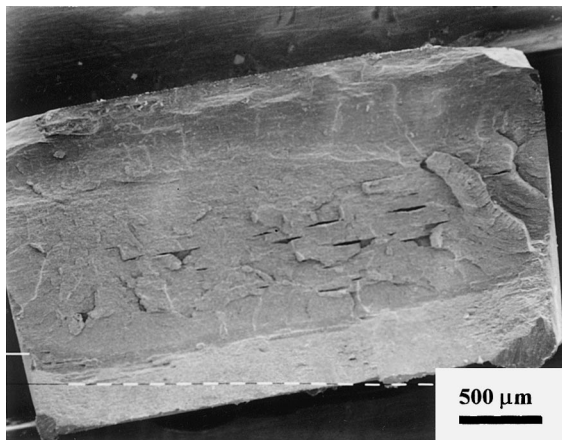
Typical fracture surface of samples C after DHC test. Three zones are observed: the initial crack in the blister (top of the figure), crack propagation by DHC (middle), final ductile fracture (bottom of the figure).
